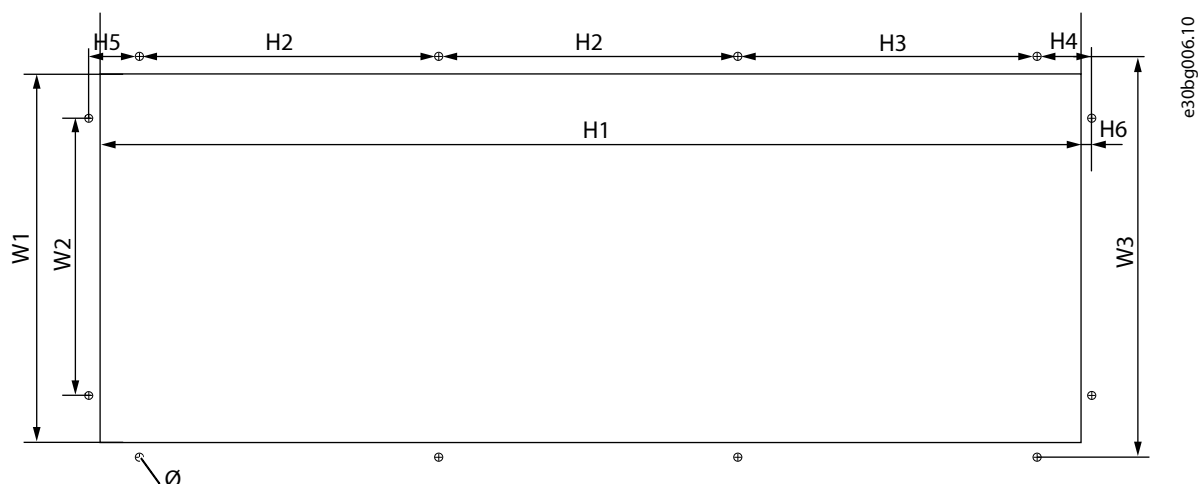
Dimensions of the Opening and Drive Outline with Flange, FI7
